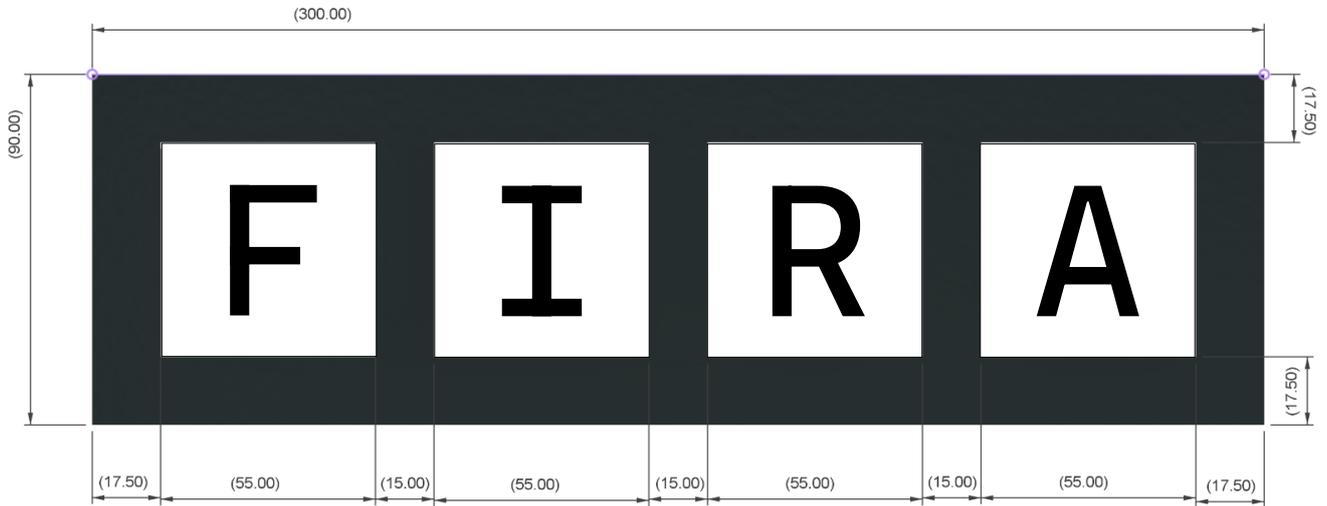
Dimensions of the Cargo Placement Area(Unit: mm)
